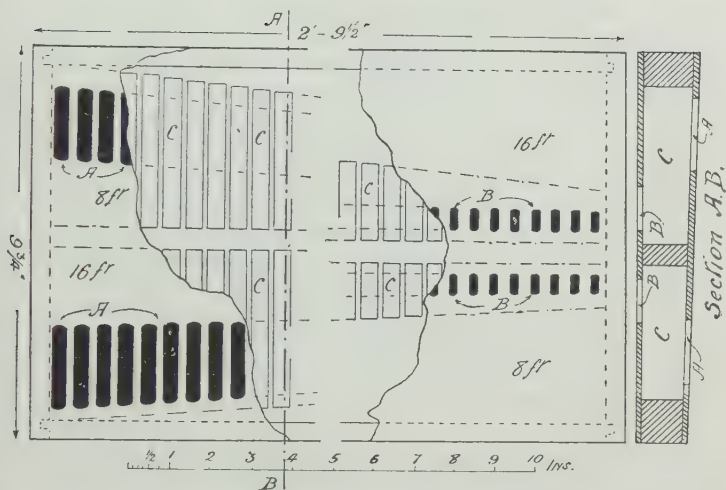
PLAN AND SECTION OF REED PAN (PART OF).
